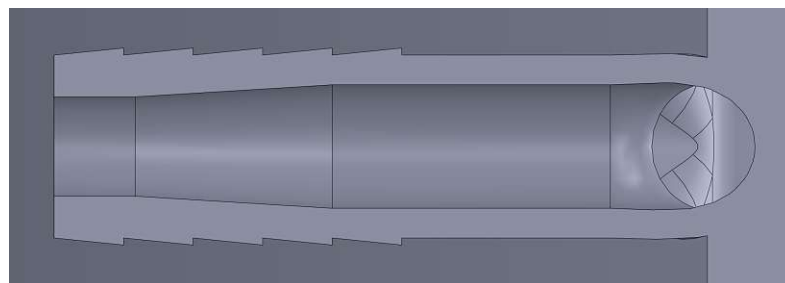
Cutaway of hose barb fitting for the outlet designed in SolidWorks.
